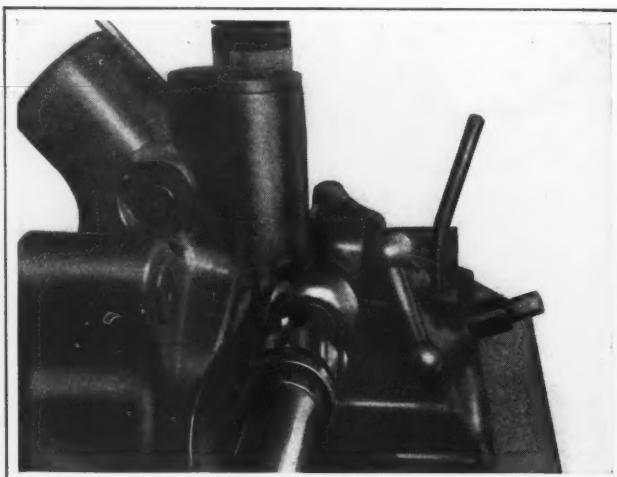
Position of the Reamer in Relation to the Setting Gage and Grinding Wheel
